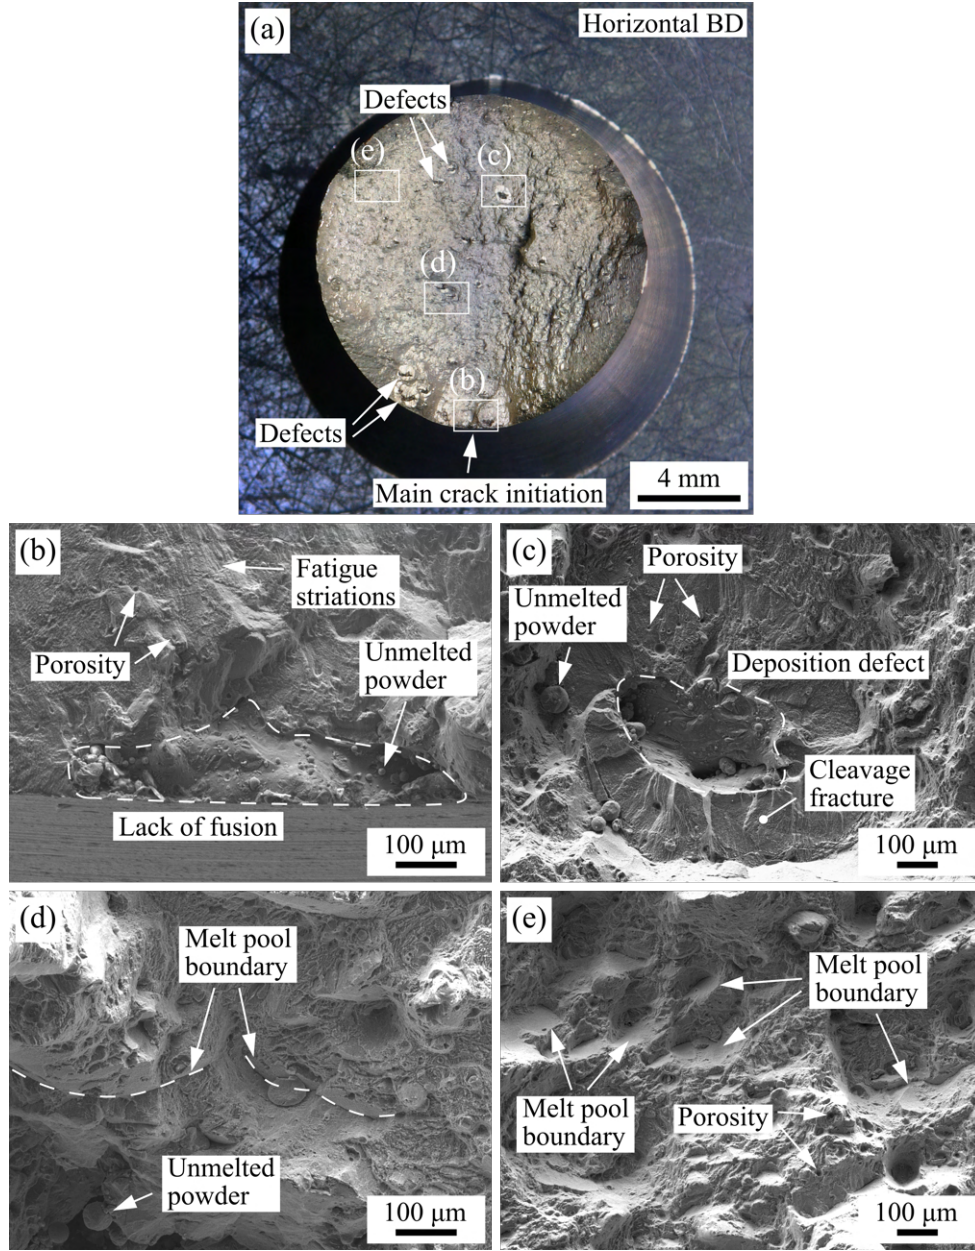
The fracture surface of the horizontally built specimen from the performed LCF test with $\varepsilon_a = 6 \times 10^{-3}$. An overview of the entire fracture surface is shown in (a), with a detailed view of the main crack initiation site presented in (b). The fracture morphology around a deposition defect resulting from the deposition strategy is depicted in (c). The propagation of cracks along the boundaries of melt pools is documented in (d) and (e), with visible deposition defects including LoF and porosity in the fracture surface.
